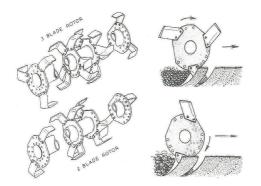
Rotary tiller rotors with L-type blades showing methods of mounting and cutting action [3]
